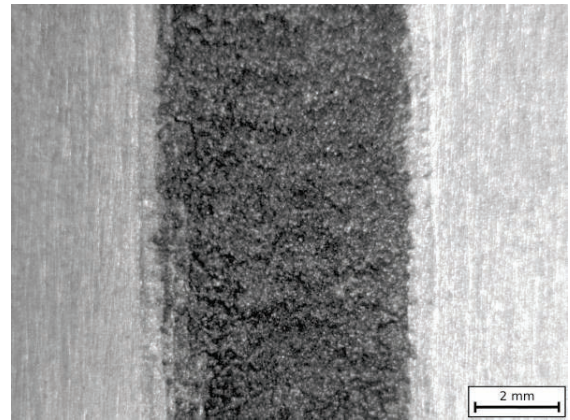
View of the MCMgAl9Zn1 cast magnesium alloy face weld after laser treatment with SiC, scan rate: 0.75 [m/min], laser power: 2.0 [kW]
